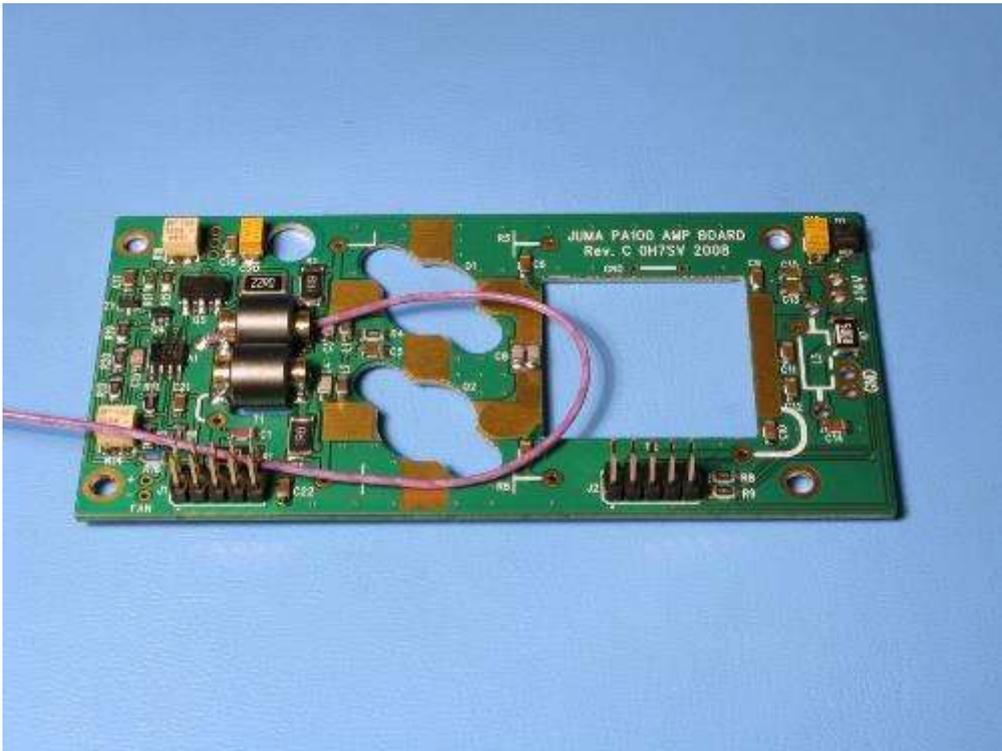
Peel one end of the thinner PTFE wire and solder the beginning of the wire.
